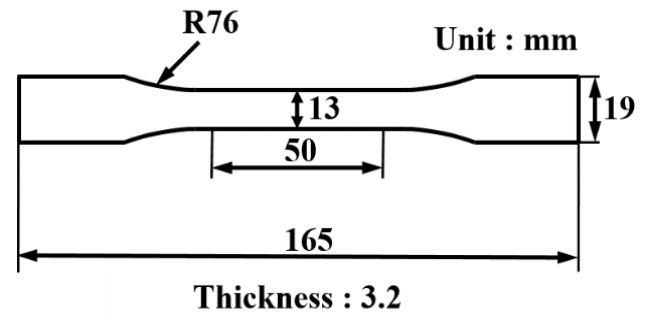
Tensile specimen(ASTM D638 Type No.1)
